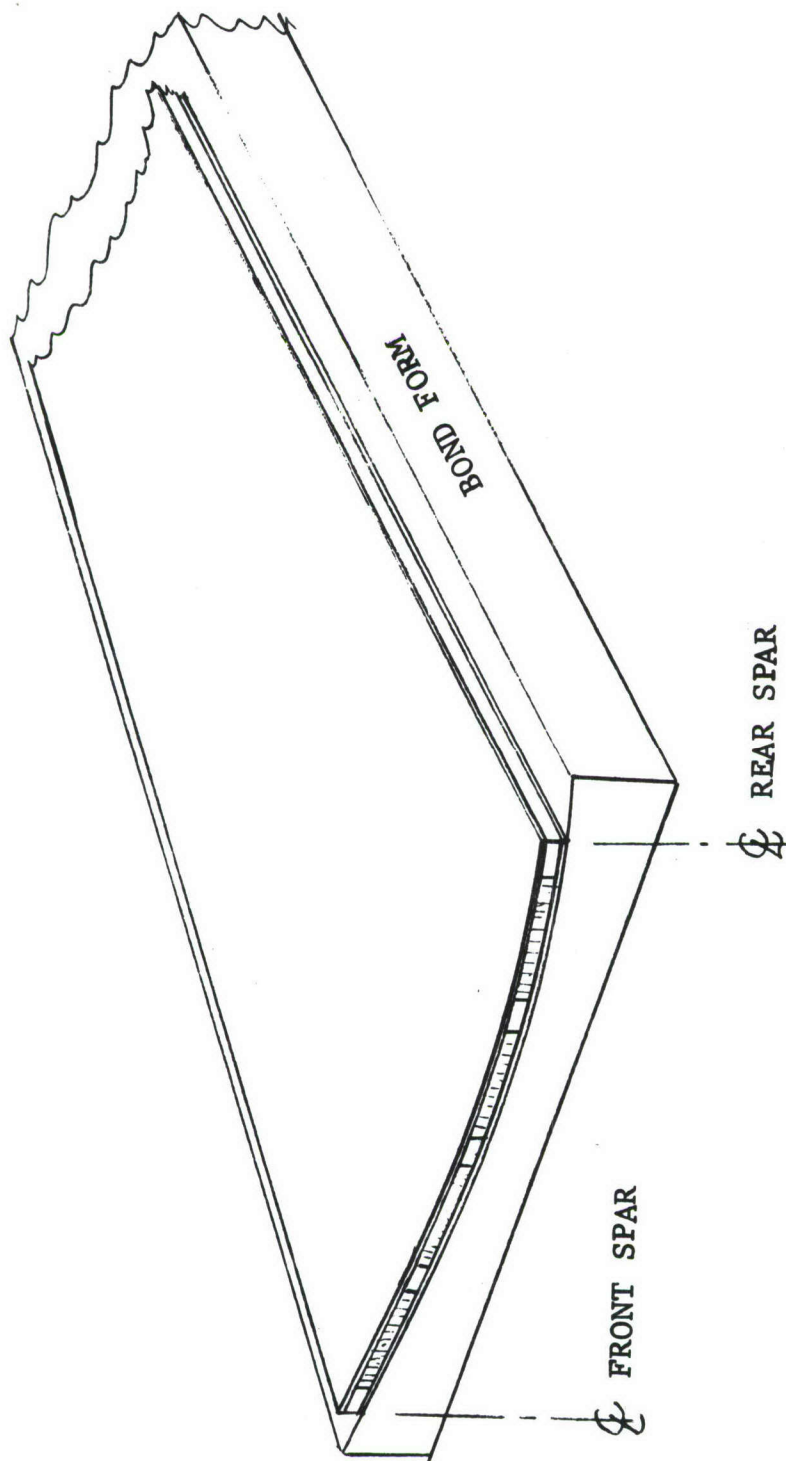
Secondary Manufacturing Lower Skin Panel Assembly
